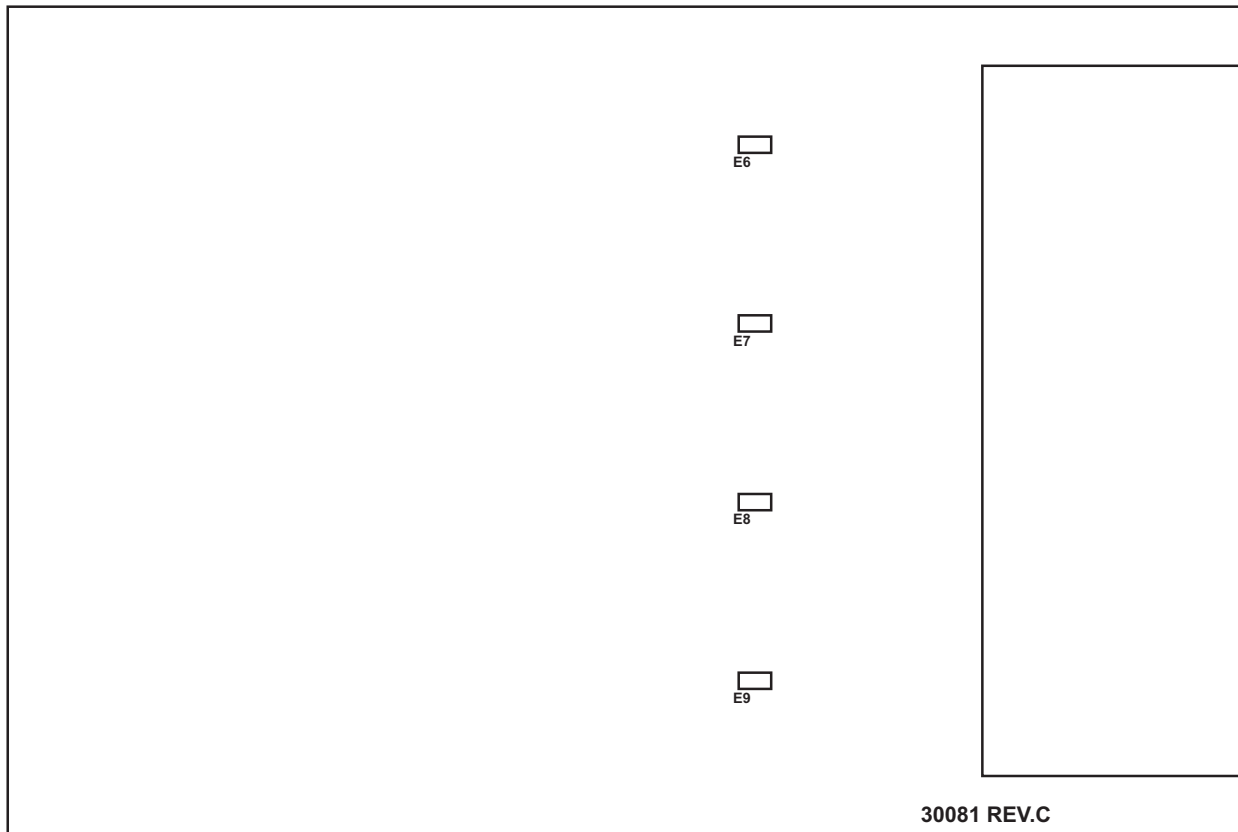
2108 Baseboard Bottom Side Jumper Locations
